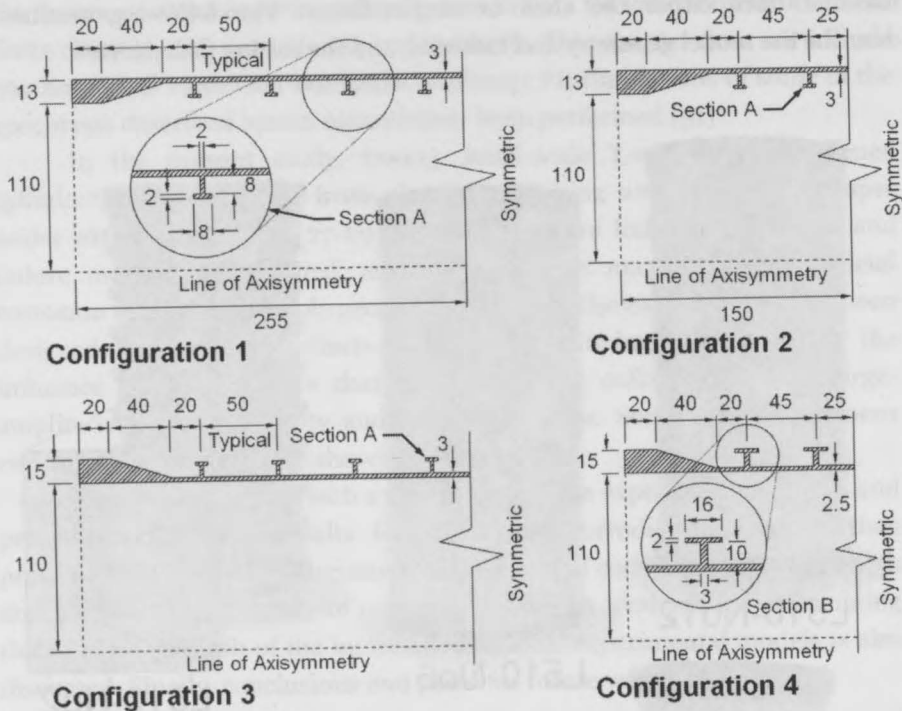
Nominal axisymmetric geometry for test specimens. All dimensions are in millimetres.
